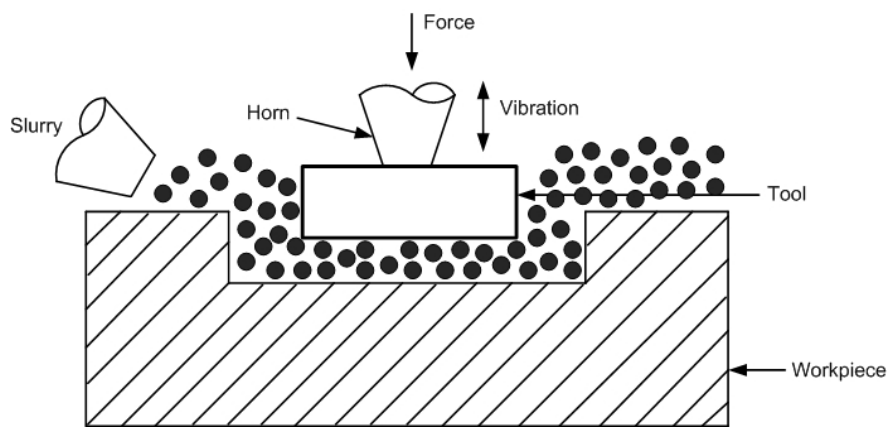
Conventional Ultrasonic Machining (USM) process
